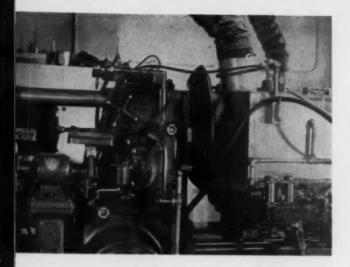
Lathe hood with heavy tool holder and boring bar mounted on the compound rest.
